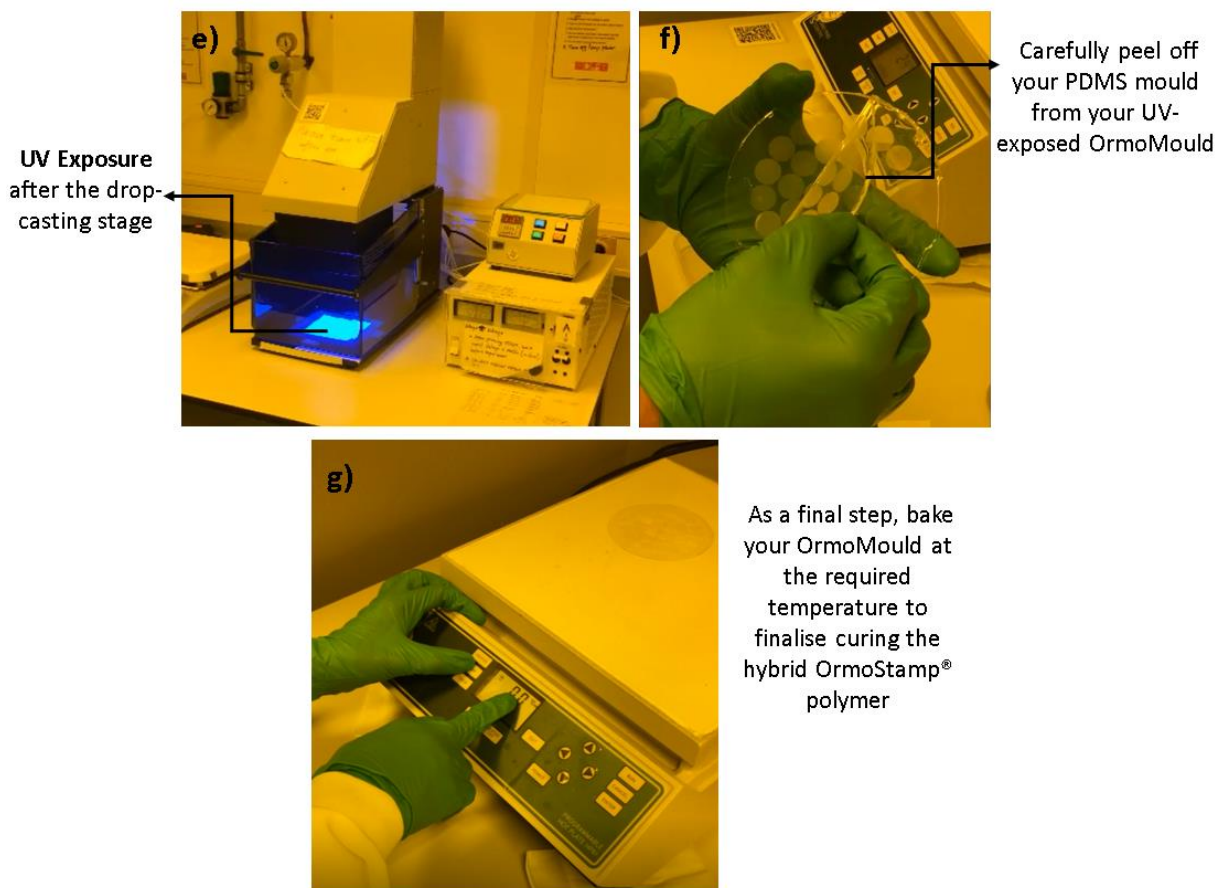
(e-g) The following required processing steps to fabricate the OrmoMould after the OrmoStamp® casting.
